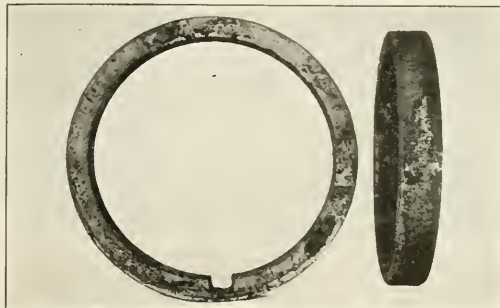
Rough Packing Tub from which Two Valve Packing Rings Are Made
